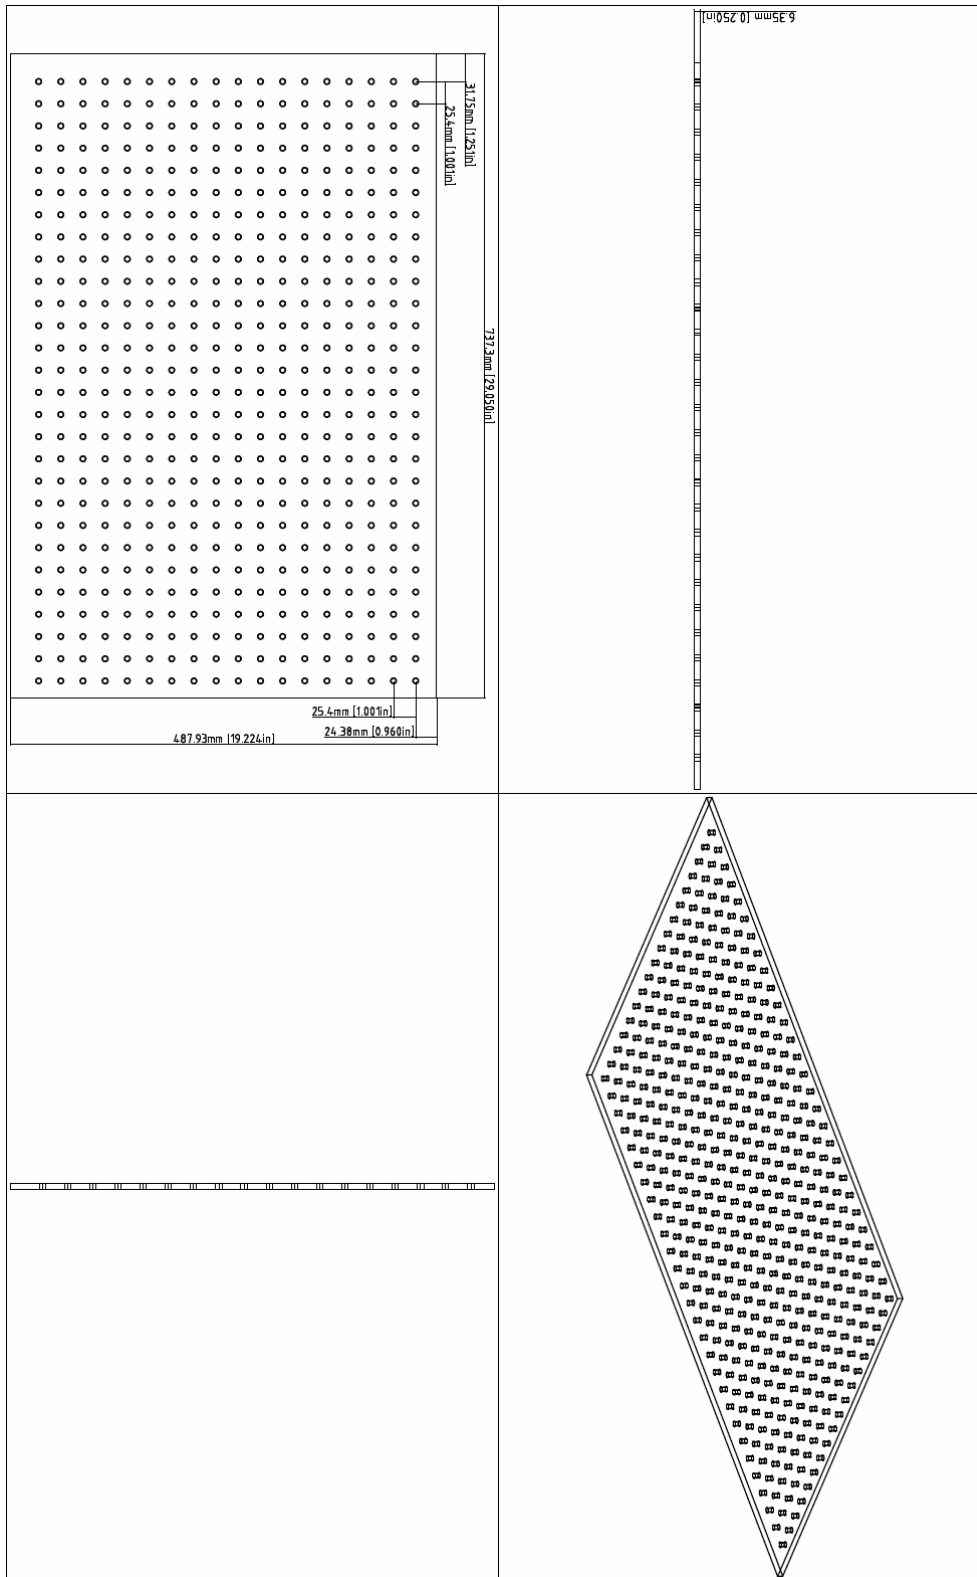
Dimensioned aluminum NSOM box false bottom optical mount schematic.
